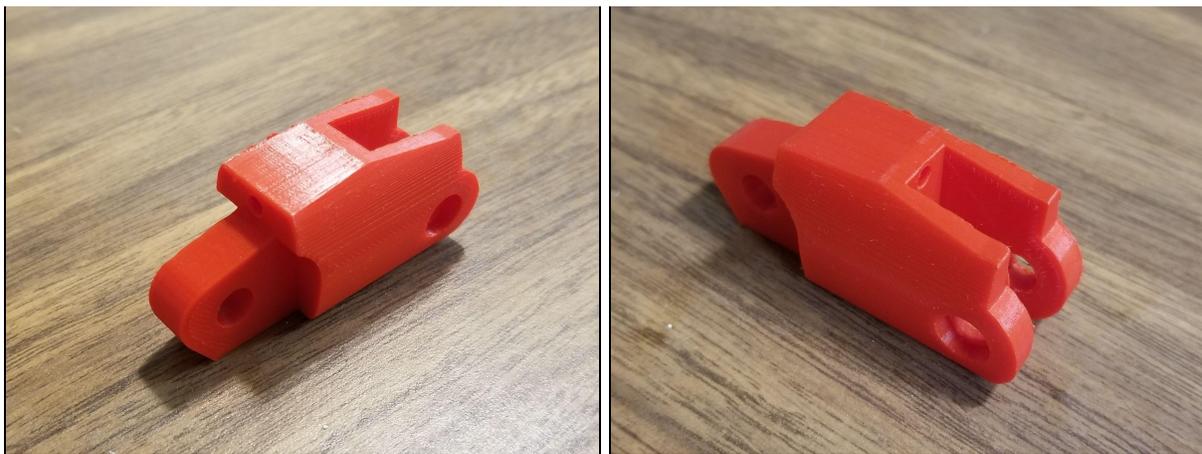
The first iteration of the 3D printed phalange extension component. This prototype has both a male and female end to allow it to join with existing parts without adjustment of those components.
